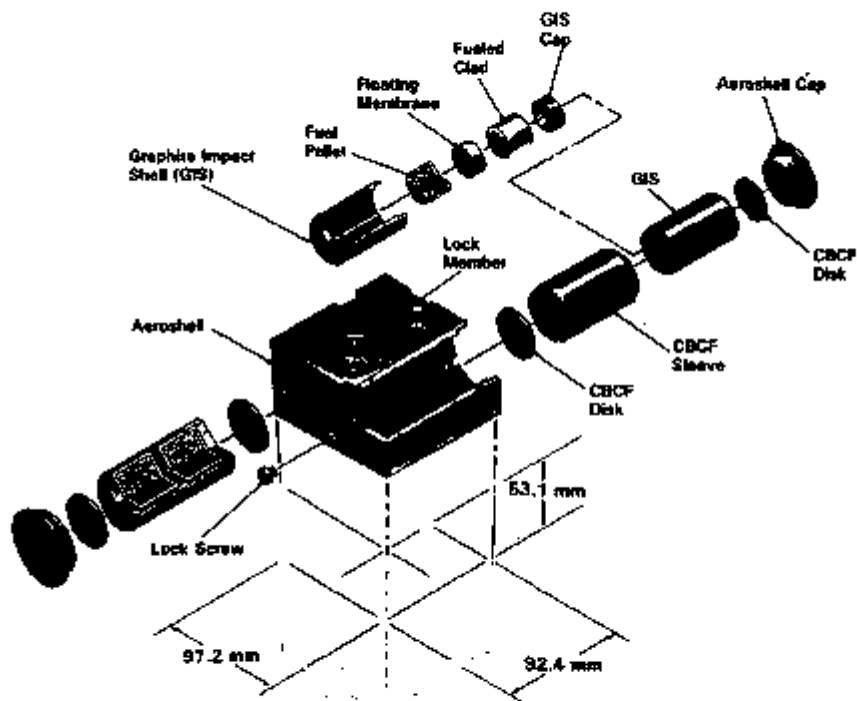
General Purpose Heat Source (GPHS) Assembly Detail.
